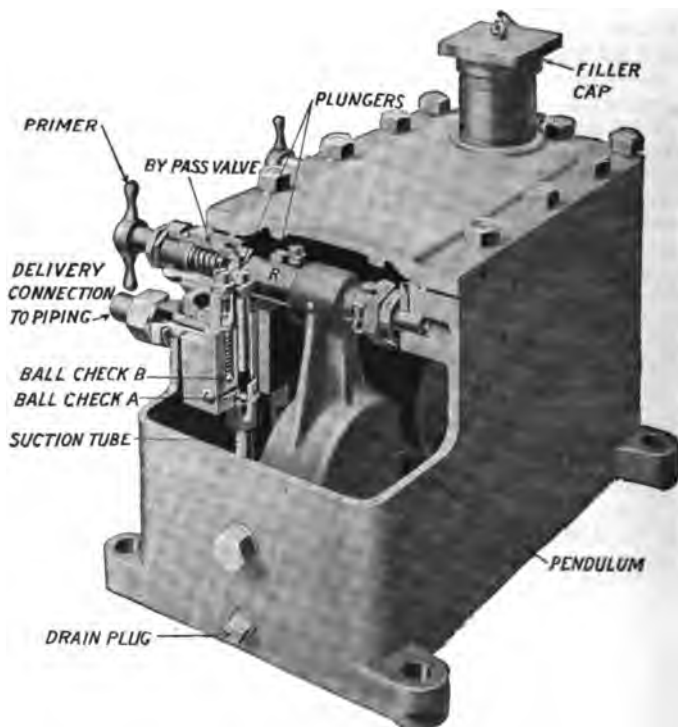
SEC. 10gg. —Detroit automatic flange oiler.
